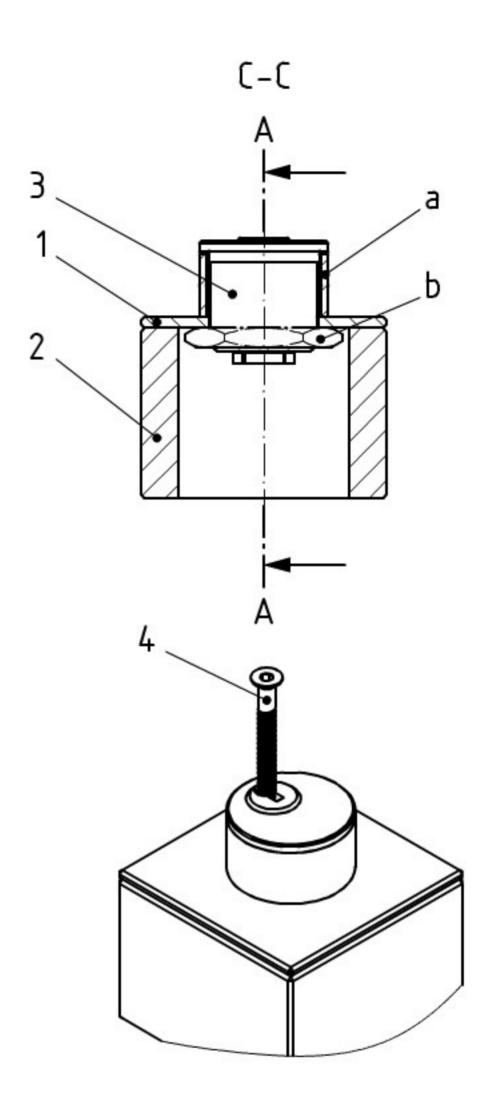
Fixture for resistance to attack by plug/cylinder extraction "Euro profile"
